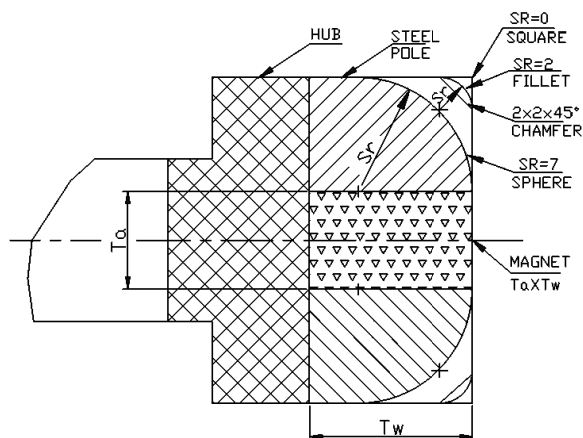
Various rims shapes of magnetic wheel (a) Square edge (b) Fillet edge (c) Chamfer edge (d) Sphere shape
